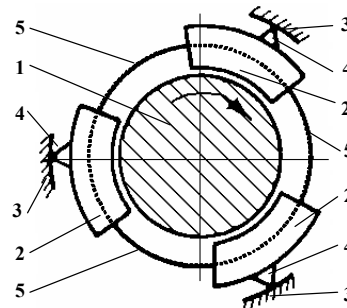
Physical model of adaptive hydrodynamic bearings with elastic ring that is moved easily and is connected segments: 1 - rotor, 2 – segments 3 - spindle head 4 - adaptive thrust, 5 - elastic ring
